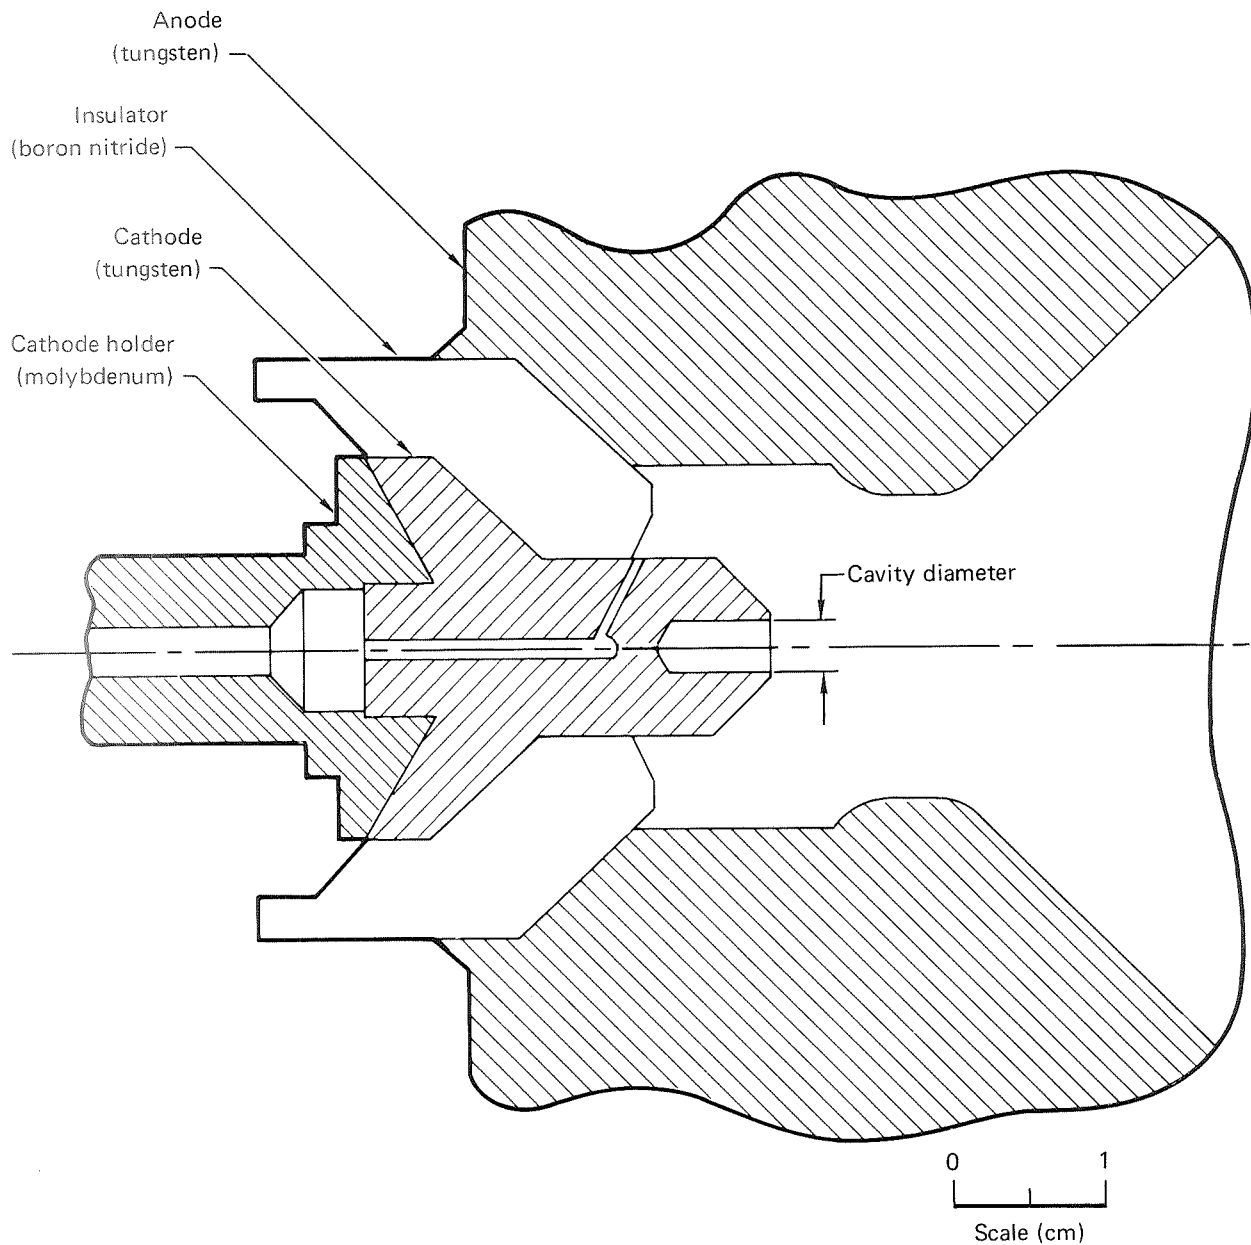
MDC X-7 thruster cathode-insulator assembly (hollow conical cathode)
